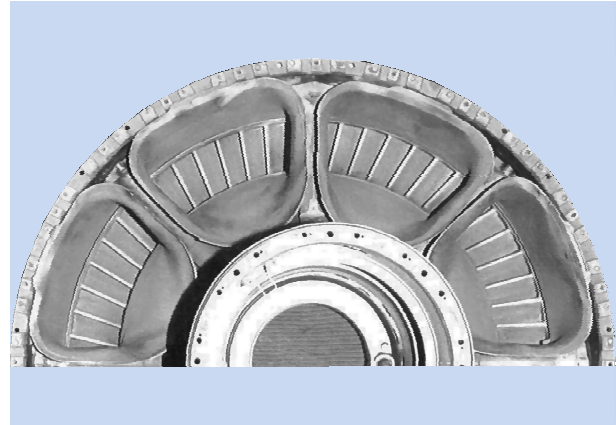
Power Turbine Blades - Parts Exposed to the Combustion Gas
